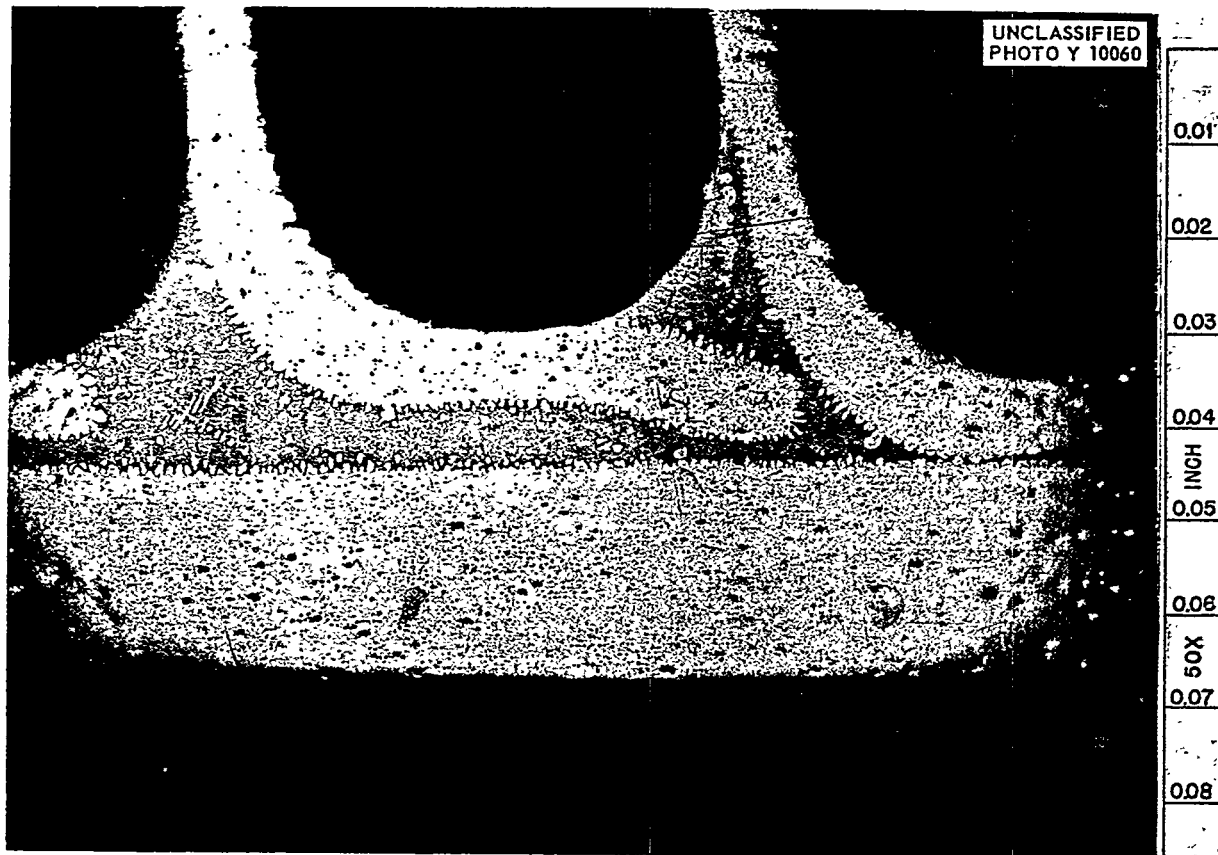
Tube-to-Fin Joints Brazed with Preplated "Electroless" Nickel-Phosphorus Brazing Alloy.
